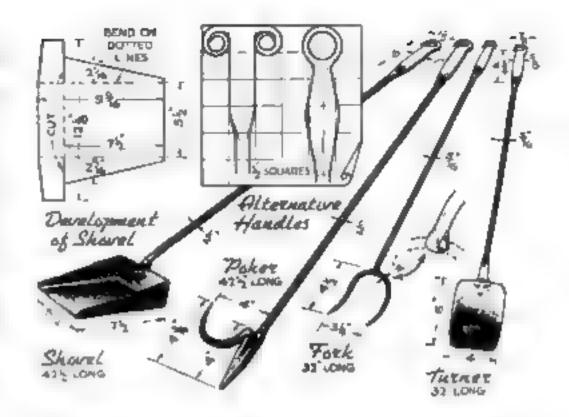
These outdoor-cooking accessories can be made of sheet metal and iron rod. Rivet or weld the parts together
